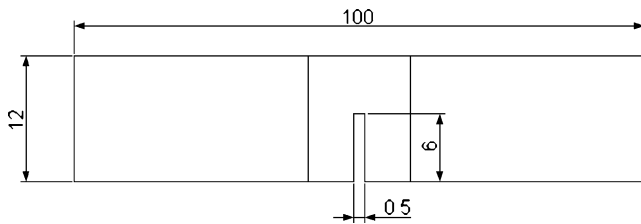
Dimension (in mm) of the EMR specimen prepared from the FSW weld
